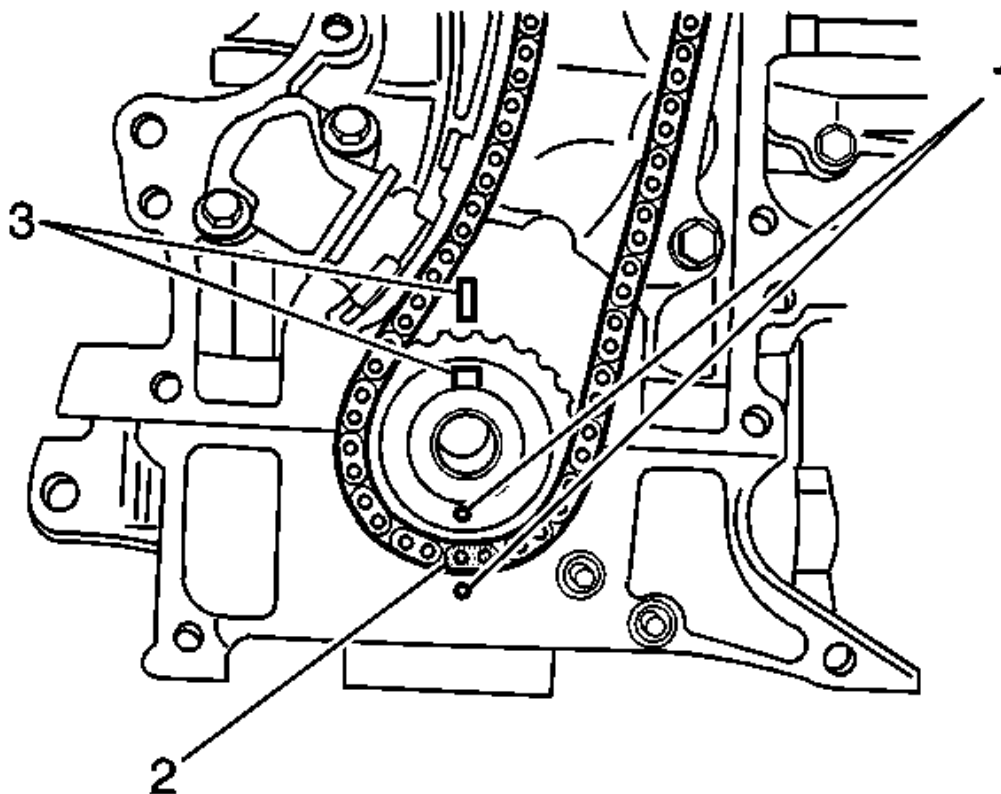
View Of Engine Block, Timing Chain & Crankshaft Timing Mark
